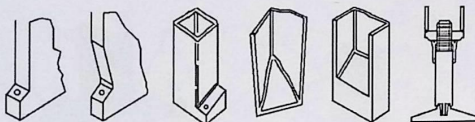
Feet ends may have a foot base with flat (not recommended) or sloped surfaces (recommended), or may consist of a pivot-socket arrangement where the pivot-end of the spindle may freely swivel in the socket or internal cavity of a separate load-bearing foot base. Feet ends with horizontal flat surfaces are not recommended. For maximum drainability, all surfaces of the feet not in contact with the floor should be sloped, with rounded corners and smooth welds (APV Baker, 2001).
